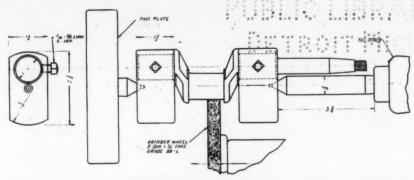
Using offset center blocks to grind the throw bearing of a crankshaft between centers on the lathe.
